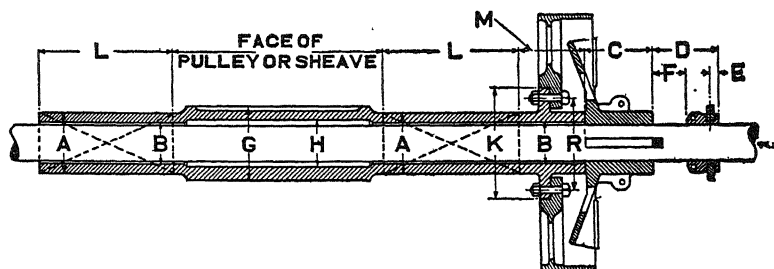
,272.—Quill drive. This is the proper transmission arrangement as substitute for heavy service, requiring large pulleys, sheaves, gears, etc. It is a hollow shaft supported by independent bearings. The main driving shaft running through the quill is thus relieved of all transverse stresses. The power is transmitted to the quill by means of a friction or jaw clutch. When the clutch is thrown out, the pulley or sheave stands idle and the driving shaft revolves freely within the quill. As there is no contact between moving parts there is no wear. Jaw clutches should be used for drives demanding positive angular displacement. They can only be thrown in and out of engagement when at rest. All very large clutch pulleys, sheaves, or gears designed to run loose on the line shaft are preferably mounted on quills. The letters A, B, C, etc., indicate the dimensions to be specified in ordering a quill.
